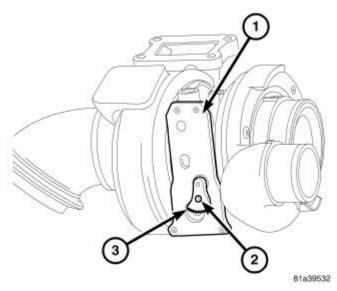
Turbocharger Bearing Housing, Alignment Hole & Turbocharger Sector Gear Courtesy of CHRYSLER GROUP, LLC
